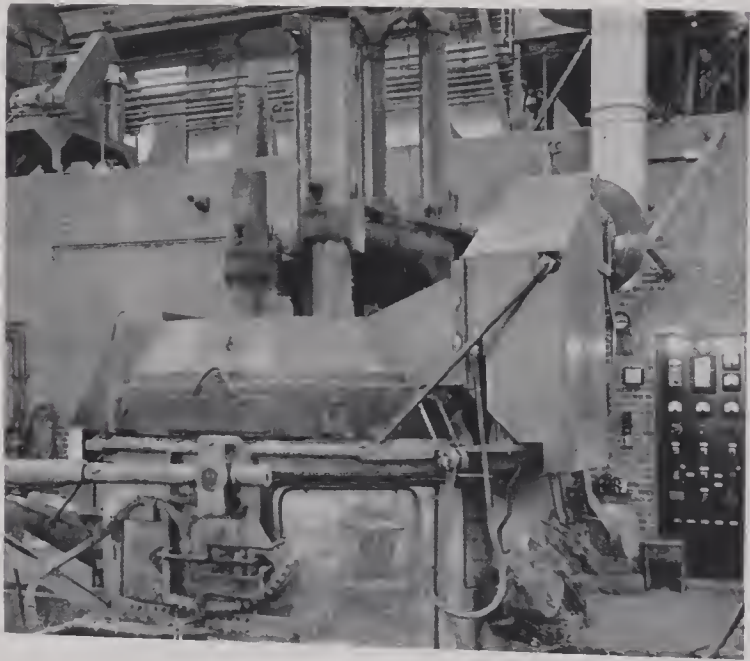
Local exhaust hood for electric furnaces (courtesy American Air Filter Co.).
